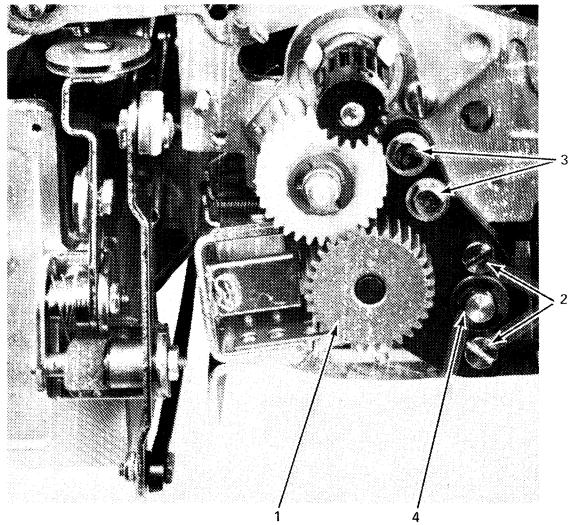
Belt Replacement (Left Side of Printer Gear Guard Removed)
